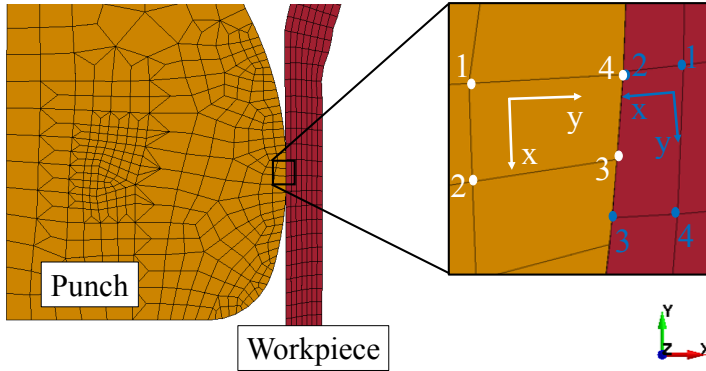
Punch/workpiece contact interface with a detailed view of the local coordinates.
